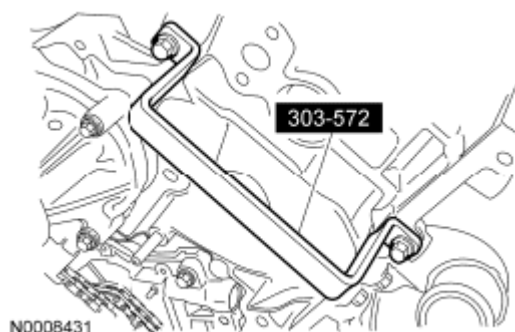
Identifying Cylinder Head Remover/Installer Onto LH Cylinder Head
